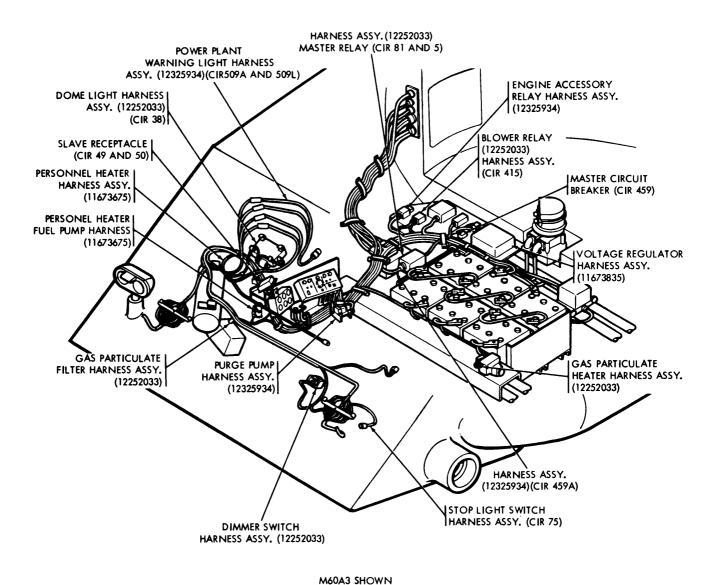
Crew compartment wiring harness and components - locational view (sheet 2 of 2).
